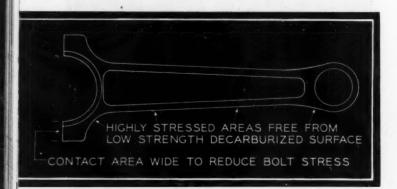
Metallurgical view of connecting rod. Hightension surface is machined and shotblasted after heat treatment. Rod should be rigid in all directions
